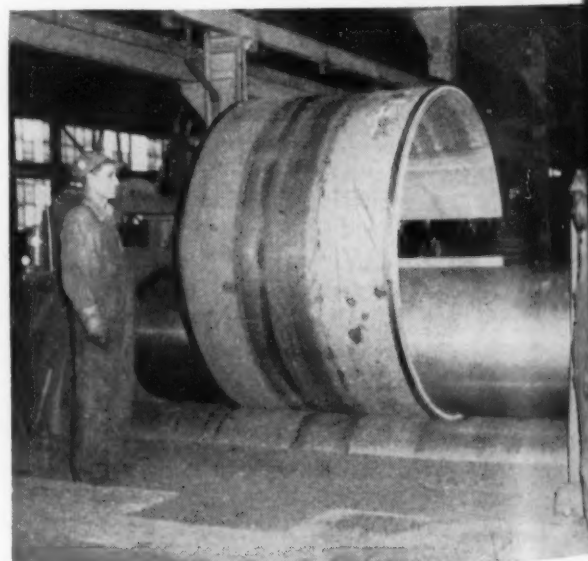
Completed rolls, cast from Meehanite metal, bend 2¼-in. thick plate for pressure vessel. The total weight of the machine is 247,000 lb.
